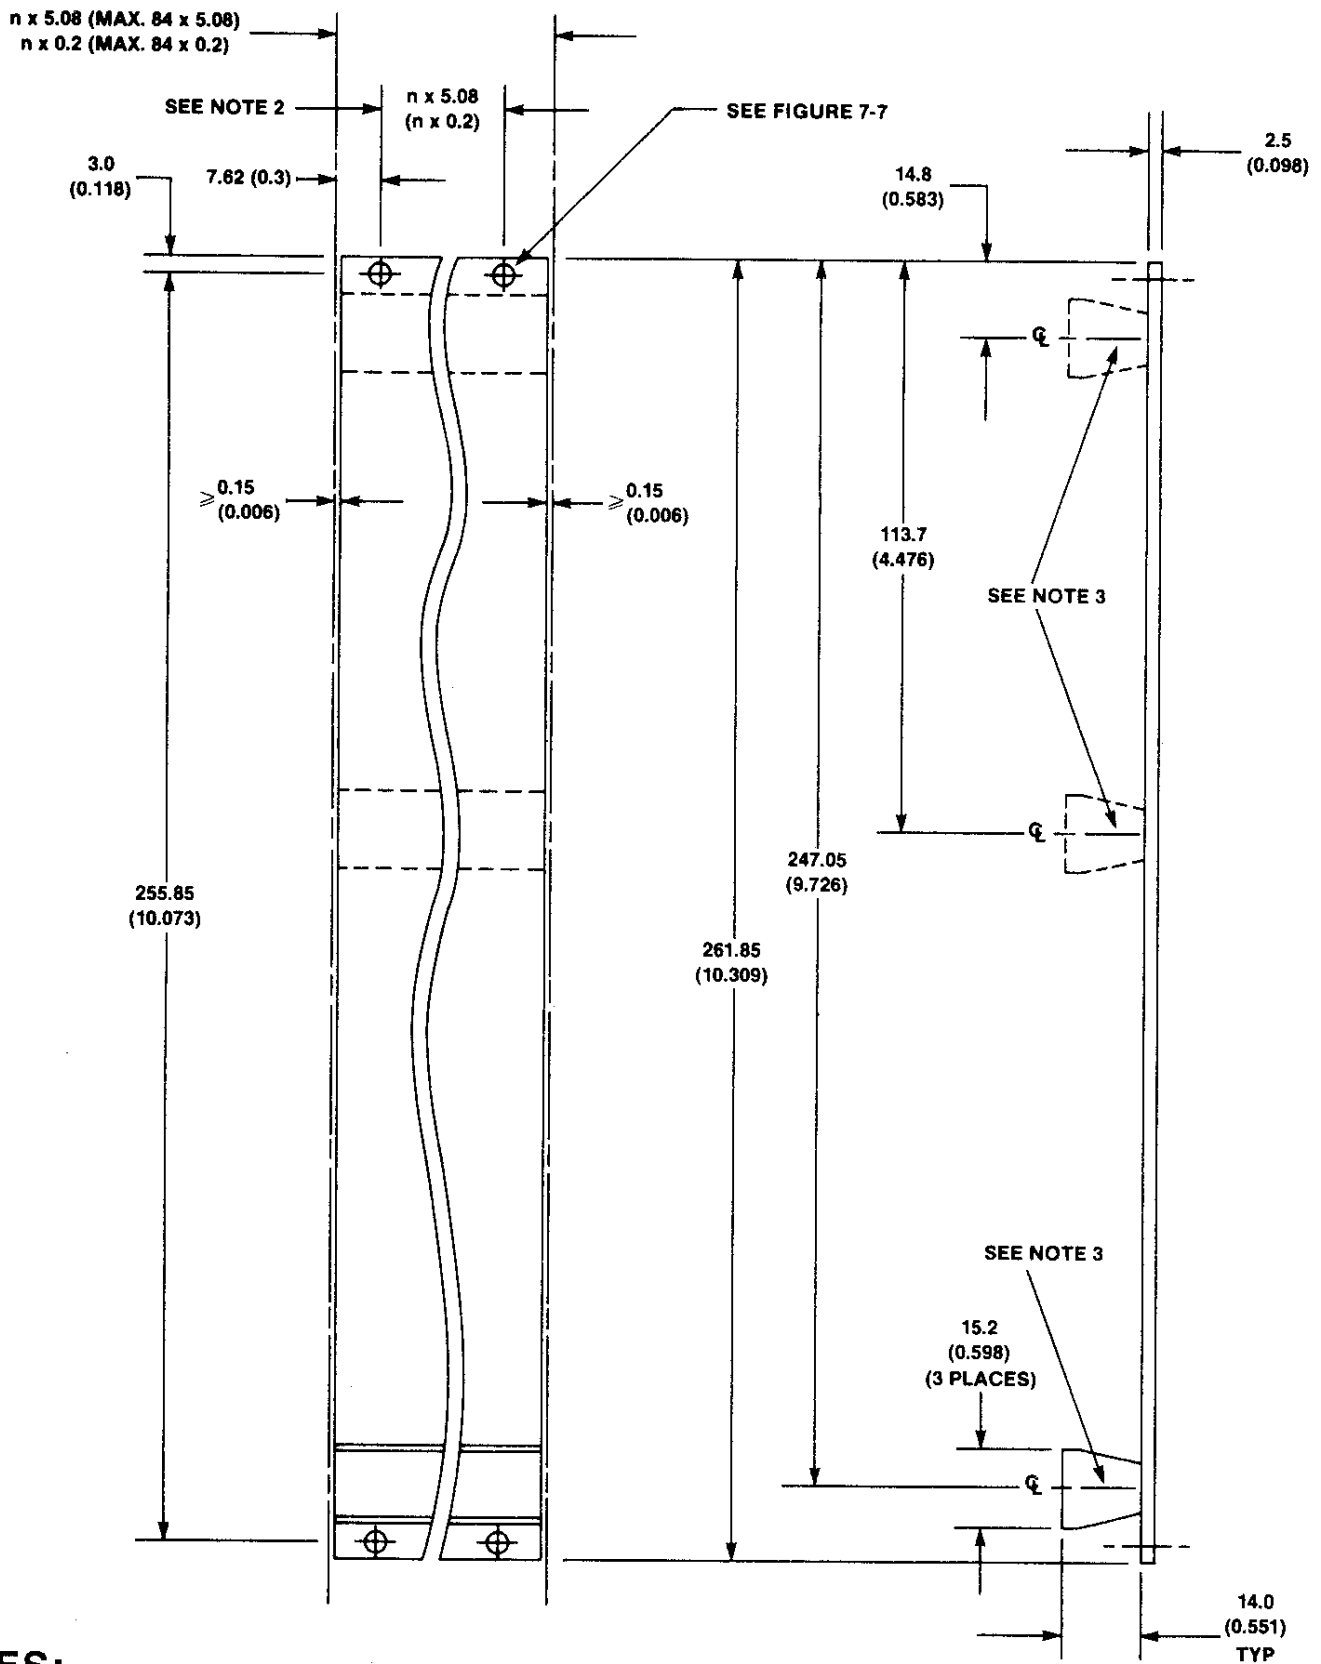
Front Panel Mounting Brackets And Dimension Of Double Height Boards.
